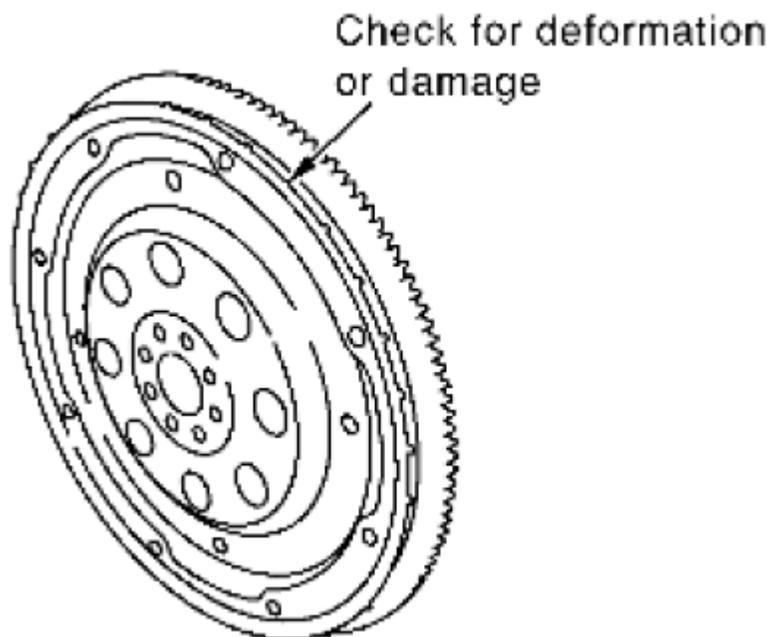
Identifying Drive Plate Deformation Or Damage Checking Position
